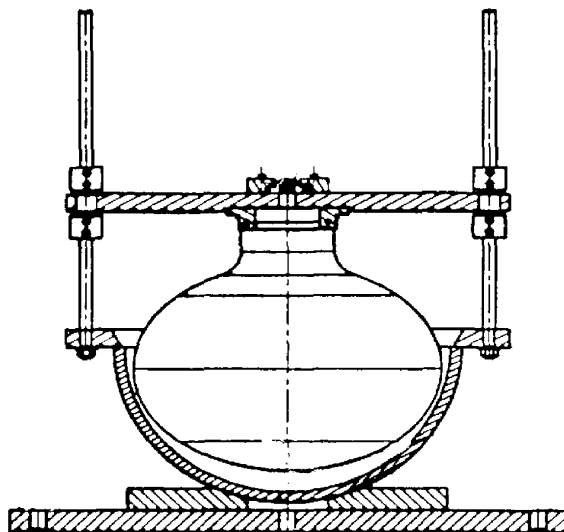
The mechanical setup for the assembling of the PMT inside the glass housing.
